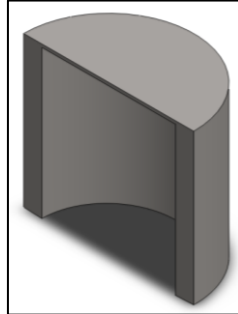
Sectioned isometric view of a CAD model of the permanent magnet cap.
